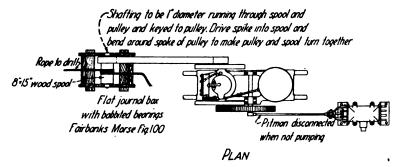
Arrangement of Gasoline Engine for Making Borings.
